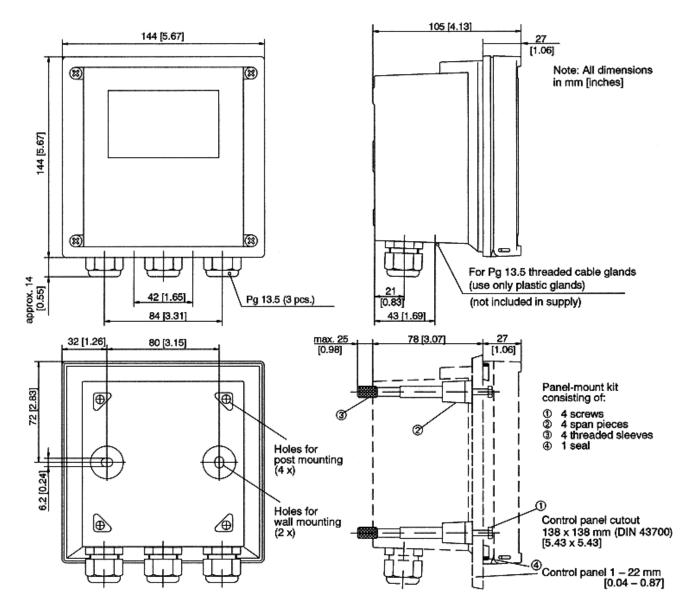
Dimension Drawing for APT2000 and P/N 51205990-001 Panel Mounting Kit
